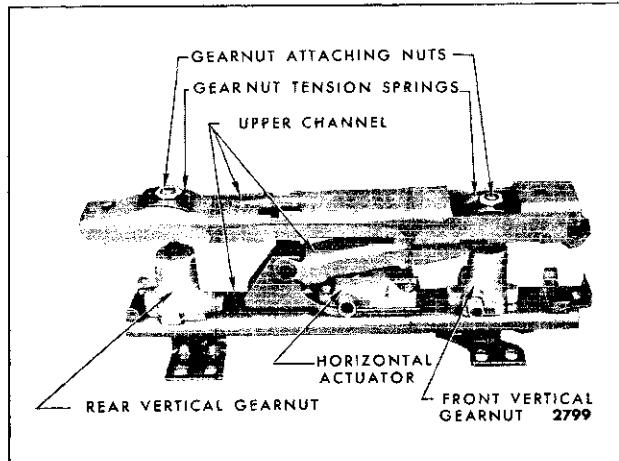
Six-Way Seat Adjuster - "B, C & E" Styles
